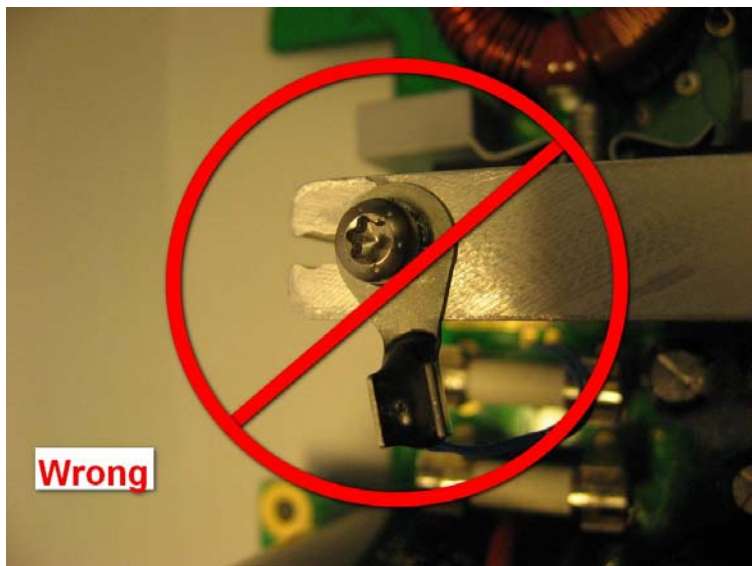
Be sure to mount the sensor correctly!! This is WRONG.
